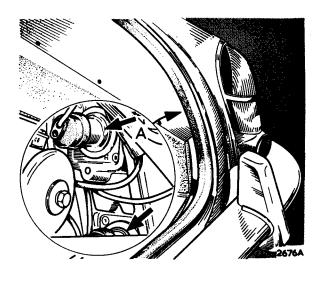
Rear flasher/rear light/brake light bulb removal
